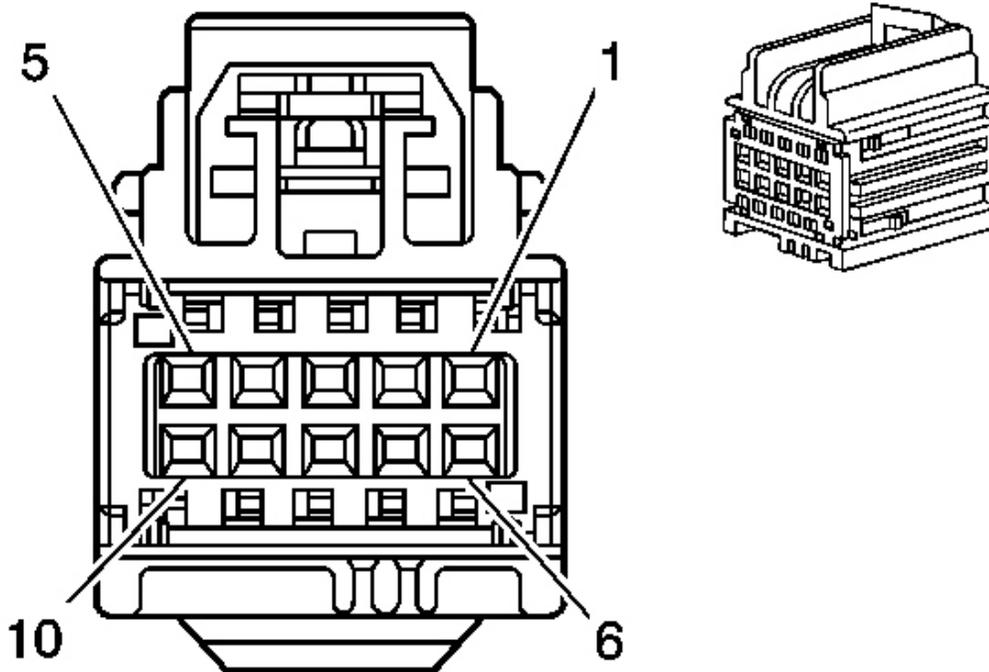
Heated Seat Control Module - Driver X3 Connector End View
